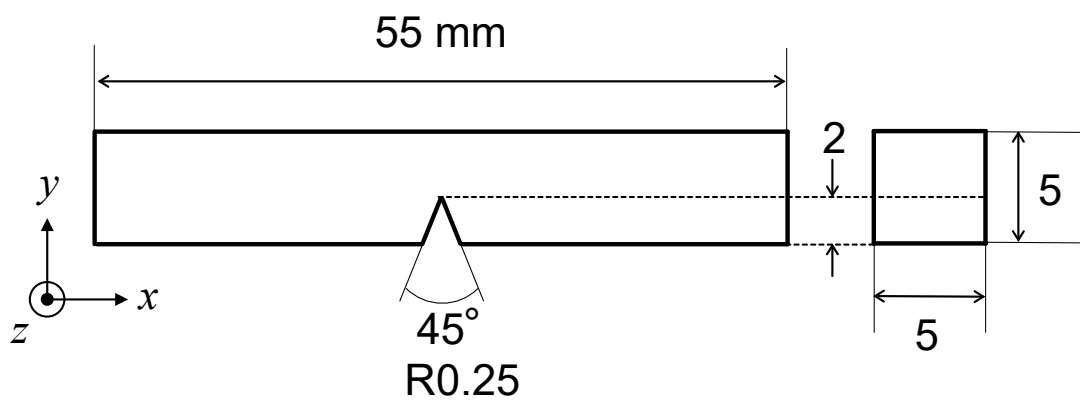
Dimension of a test piece for Charpy impact test.
